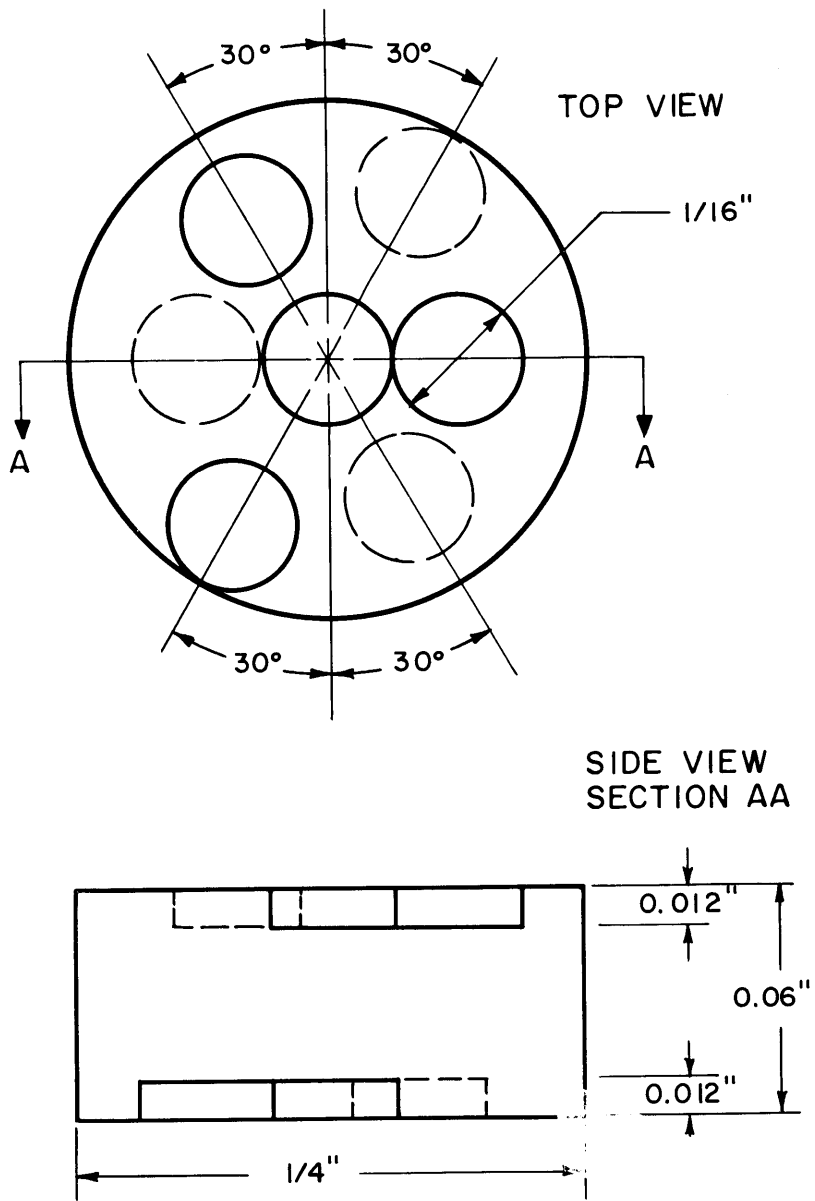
FOIL HOLDER USED FOR INNER FUEL FOILS
